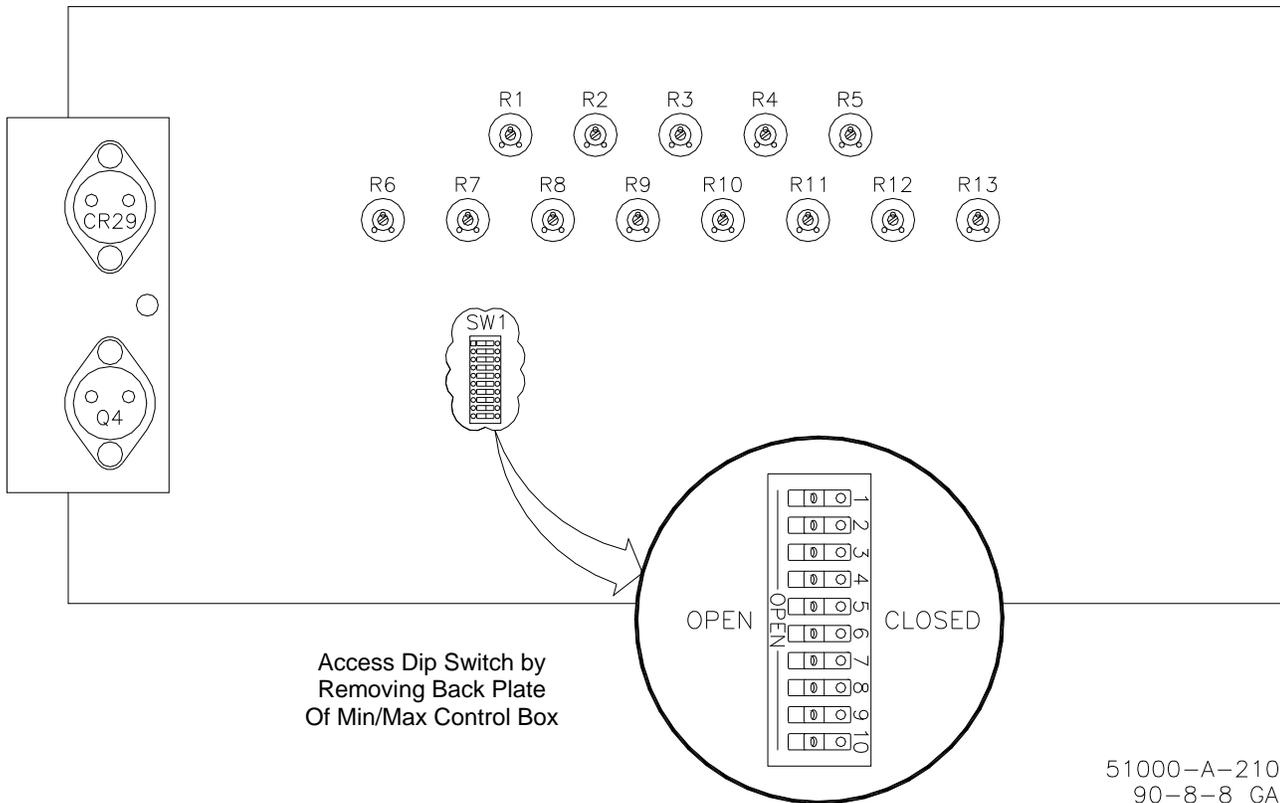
DIP Switch Location on Other Side of Printed Circuit Board
